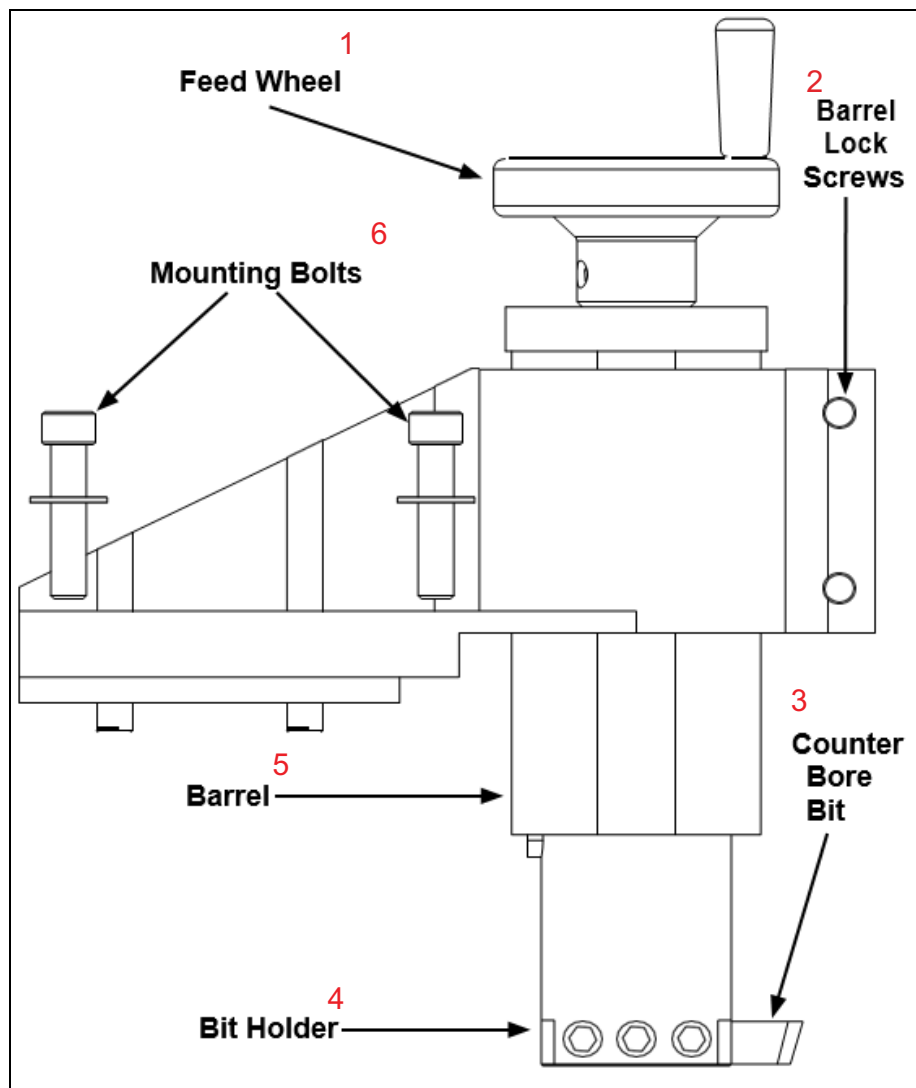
FIXED COUNTER-BORE ATTACHMENT COMPONENTS
